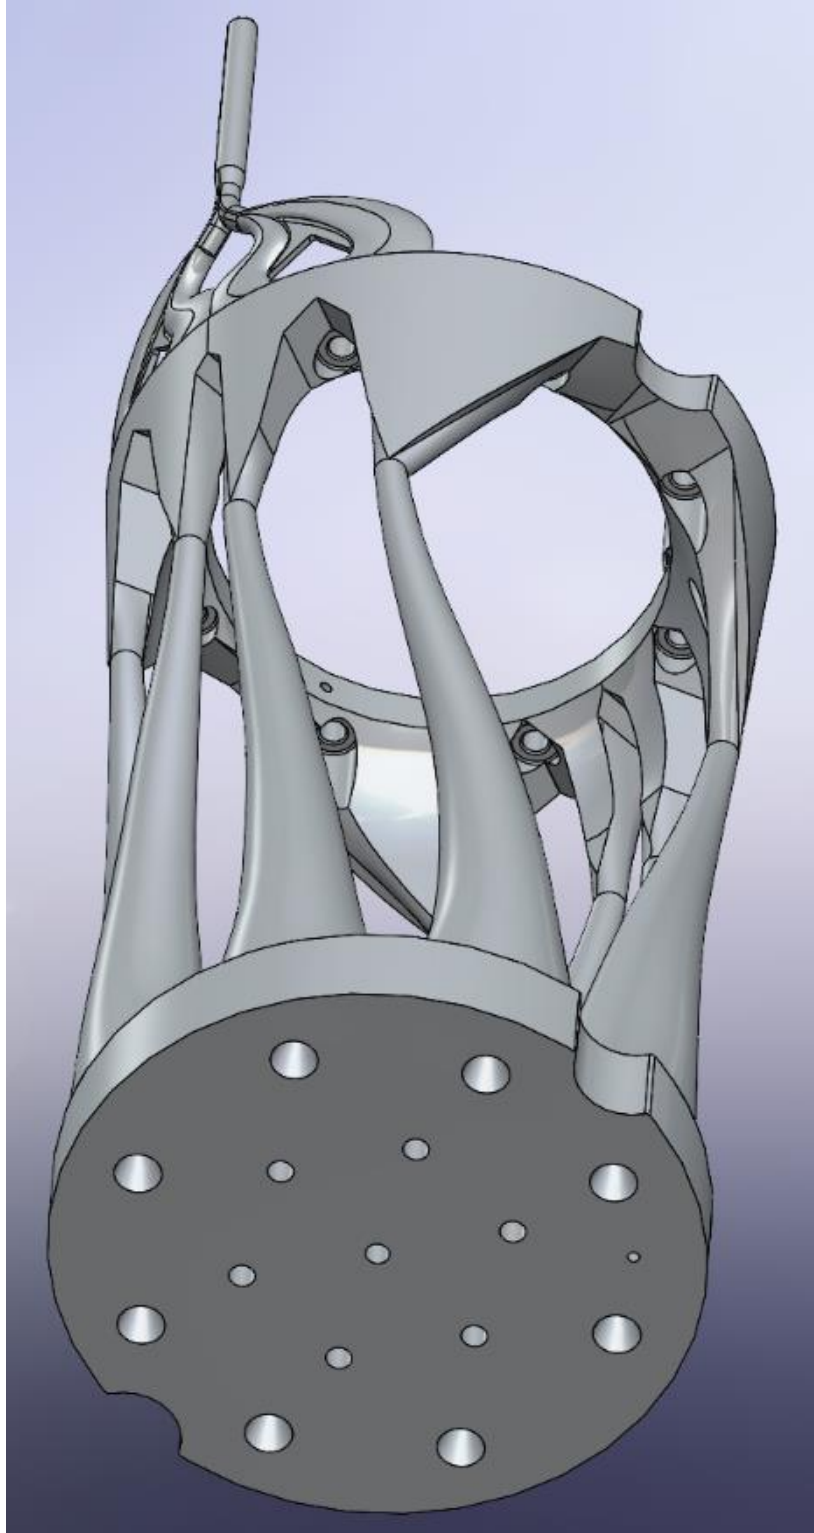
View of the final heat exchanger design from a bottom-up angled view.
